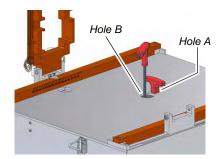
Insert T-bar into hole A, then use Hexagonal wrench to loosen bolts in hole B
